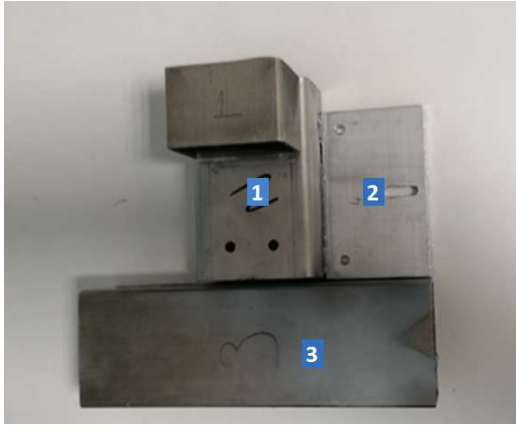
Machine parts 1, 2 and 3 being welded.
